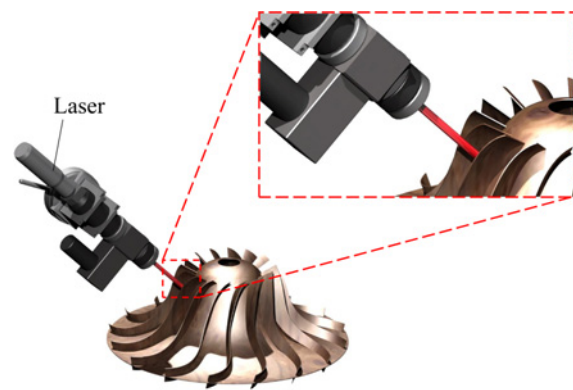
Schematic diagram of impeller blade remanufacturing by laser cladding
